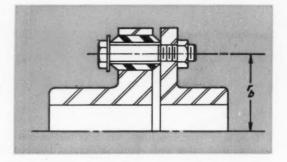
Compression-type coupling design which uses hollow elastomer bushings inserted in flange sockets.
